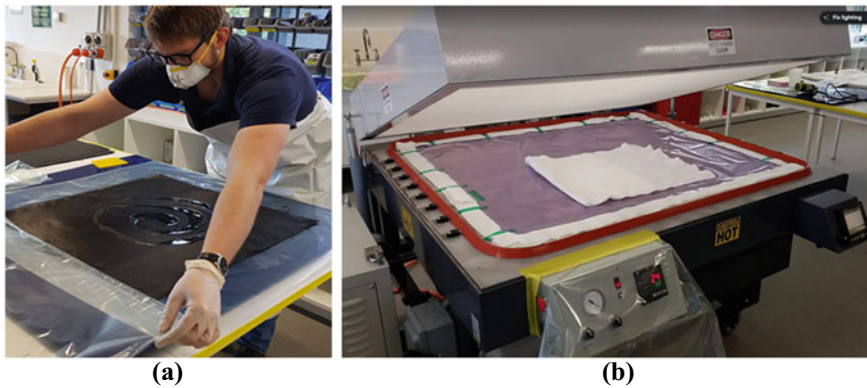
Manufacturing of CFRP panels: a resin impregnation; b vacuum bagging using the debulking table
